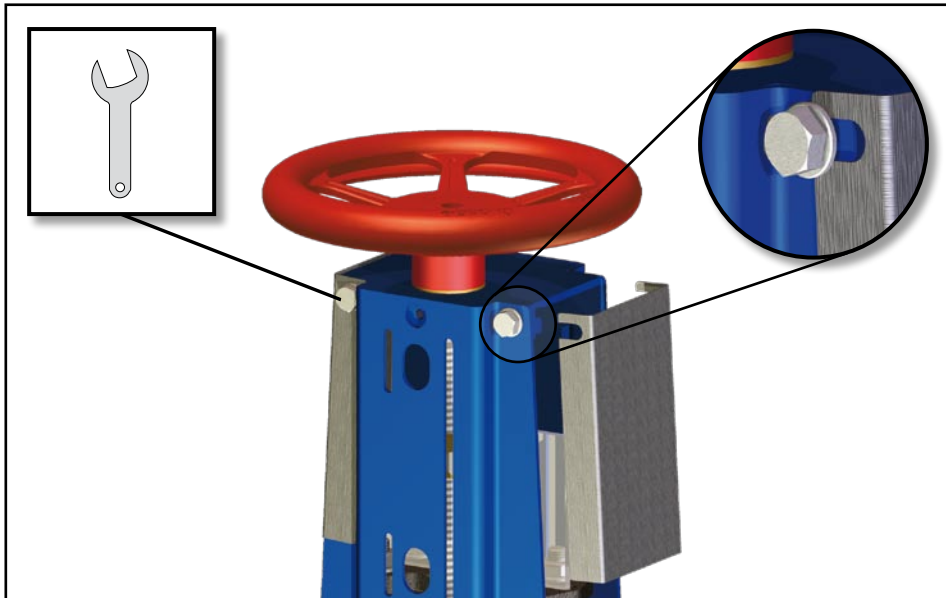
Mounting of the side protection (picture shows Art. WGE-GG-xxx-100/MW)
